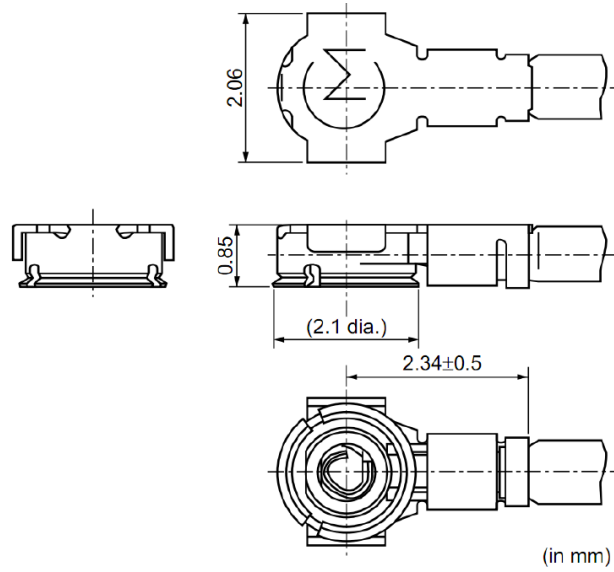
Specifications of Mated Plugs Using Ø0.81 mm Coaxial Cables (Unit: mm)
